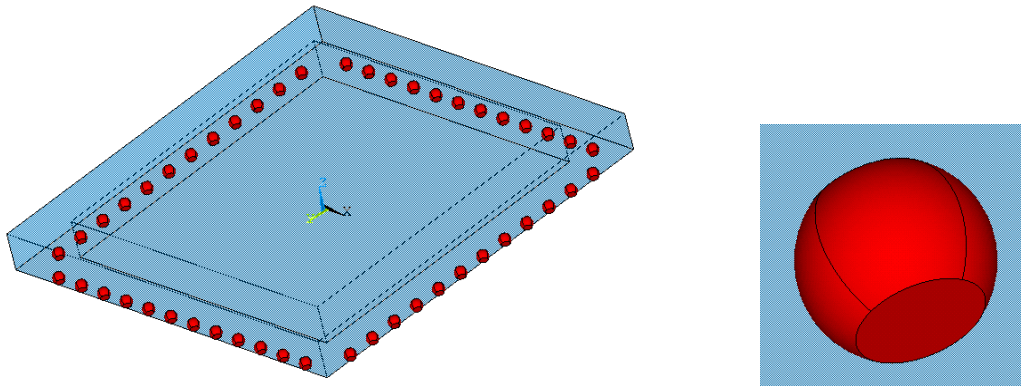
Geometric model of a PB18 test die and a solder bump
